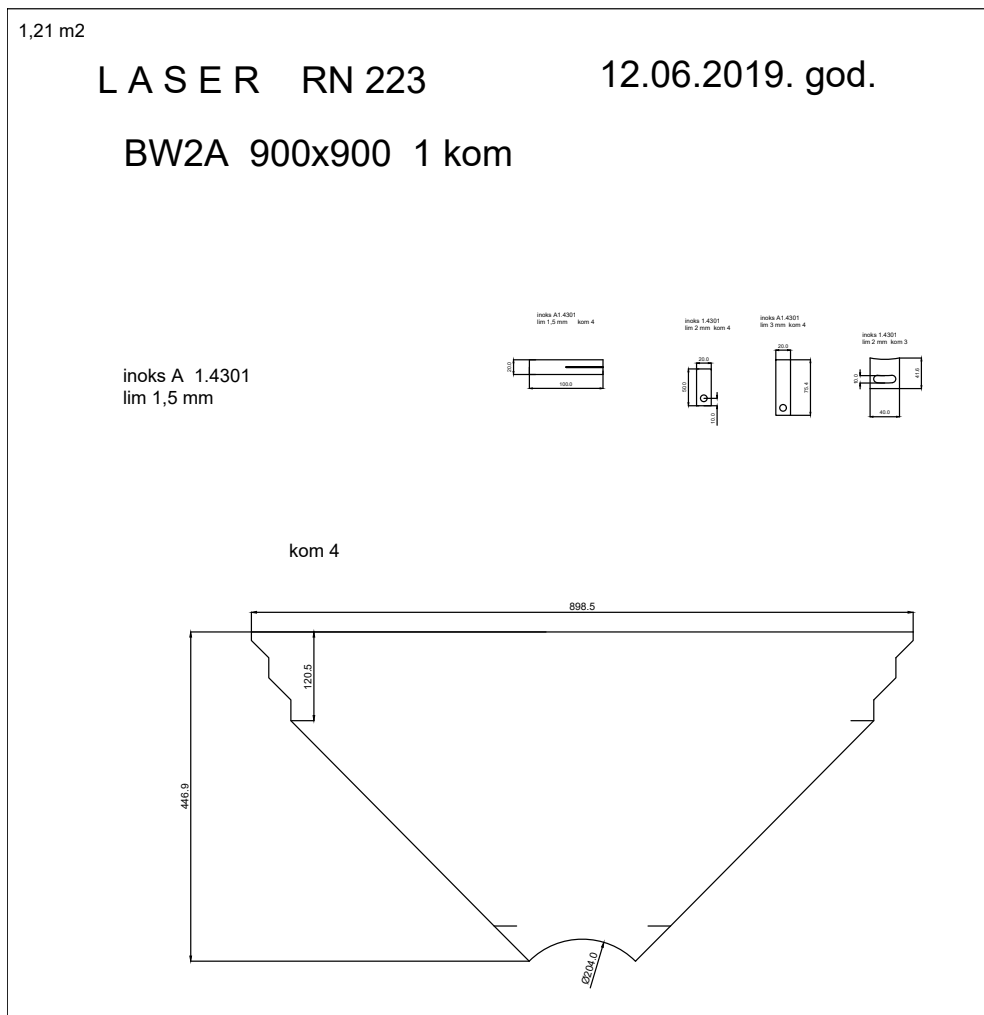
BOWA drawing for laser (Source: Own drawing)
